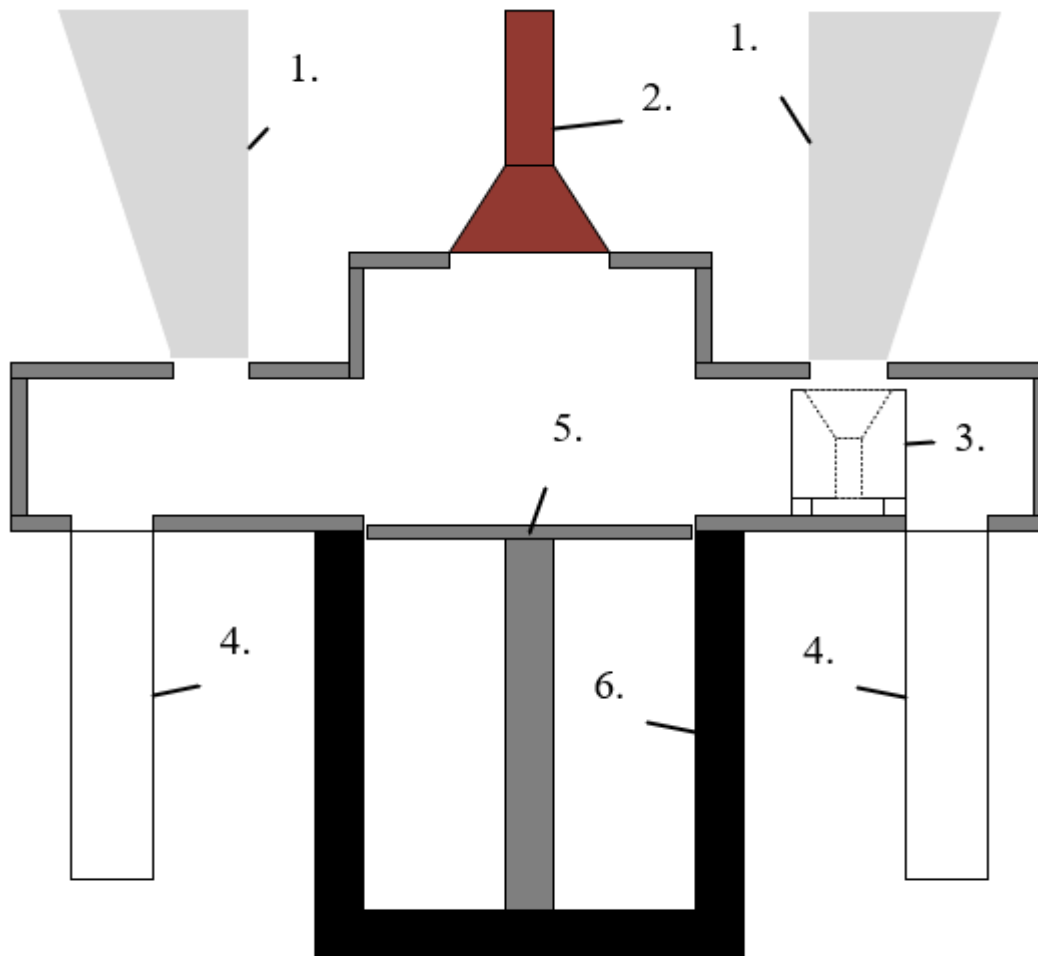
SLS 3D Printer Layout. 1. Powder Bins, 2. Carbon Dioxide Laser, 3. Recoater, 4. Cache Bins, 5. Print Bed & 6. Removable Chamber.
